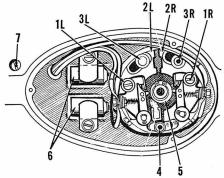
View of Mark 2T and 3T right side showing ignition timing points.
